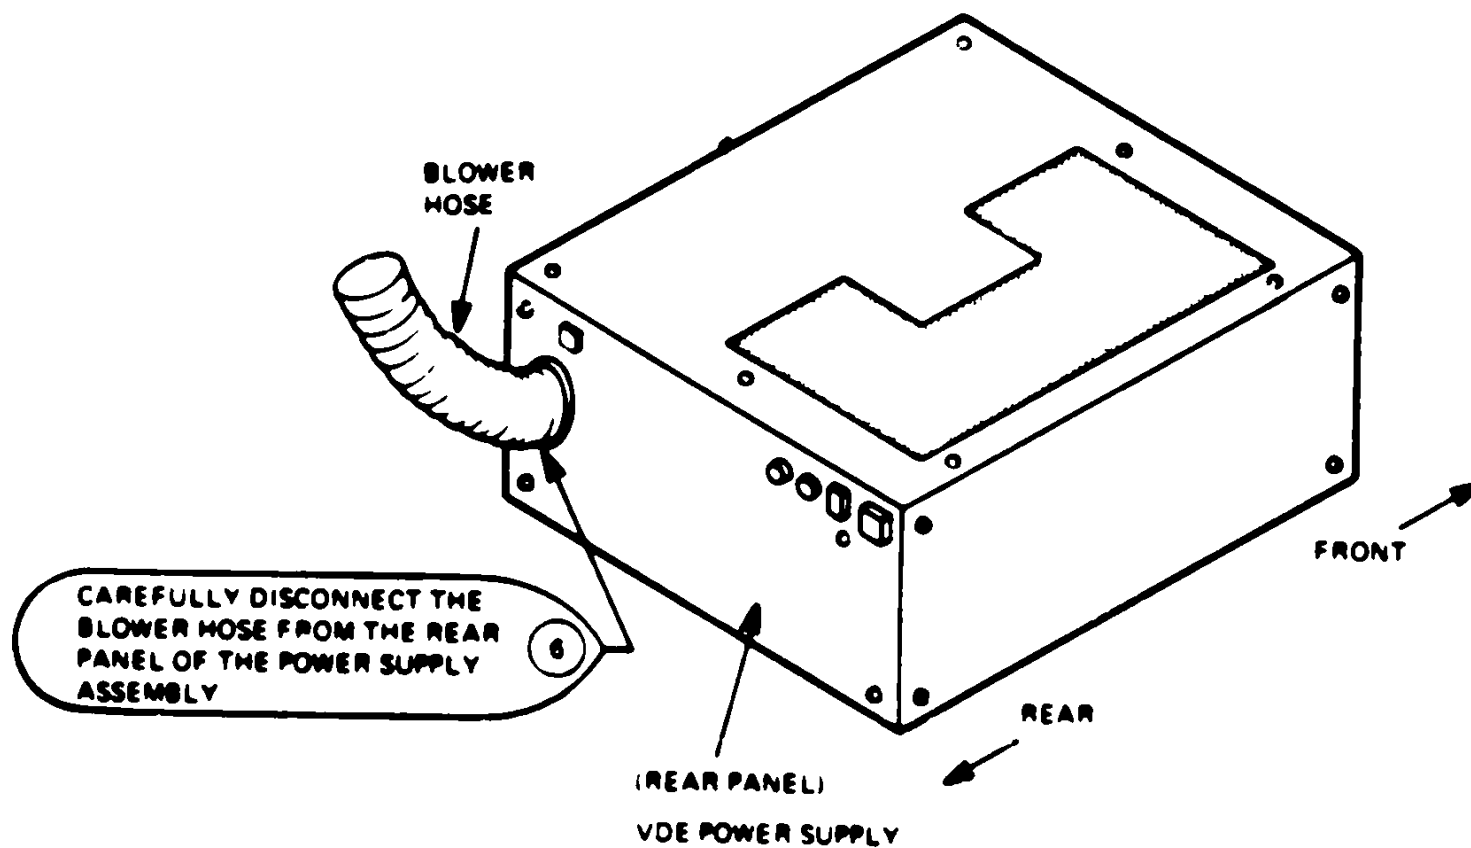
RM05 VDE POWER SUPPLY (REAR VIEW)
